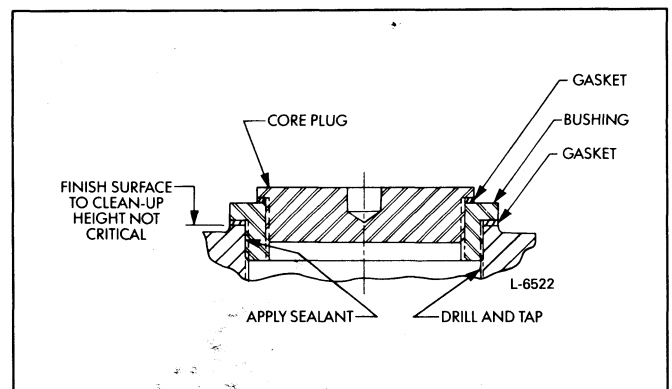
Air Box Core Plug Hole with Service Bushing and Plug Installed
